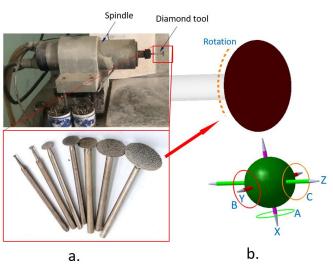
Machine table with spindle used for gemstone carving; a. Shapes of the diamond tools; b. Movement model of the sample in the process of carving
